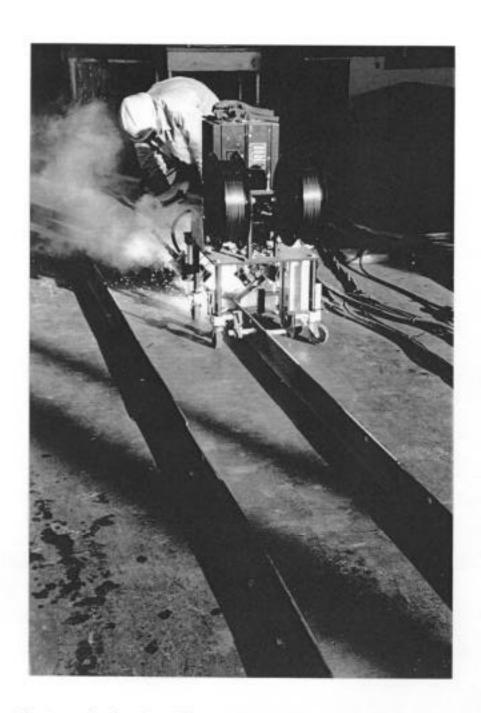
Photograph showing fillet welding of primer-coated web-and-flange assemblies using a Lincoln twin-arc welding machine. This machine is used in production operations at the McDermott Shipyard in Amelia, LA.
